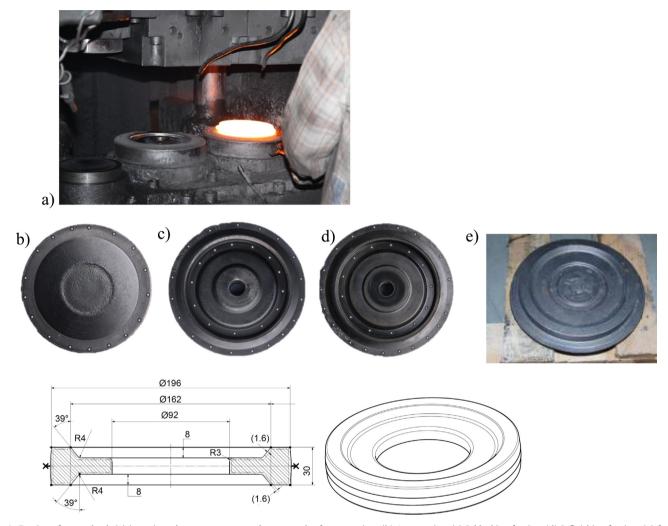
Forging of gear wheel: (a) investigated process; worn out bottom tools after operation: (b) 1- upsetting, (c) 2-blocking forging, (d) 3-finishing forging; (e) forged wheel and (f) sketch of wheel.
